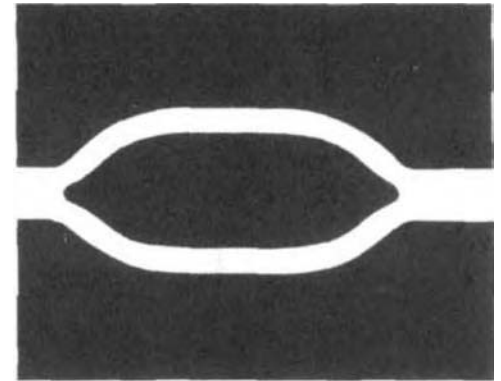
Cross section of an aluminum solar collector panel produced by the roll welding process
